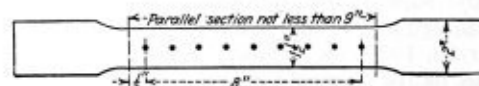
Present Form of Test Piece as Prescribed by A.S.M.E. Boiler Code
